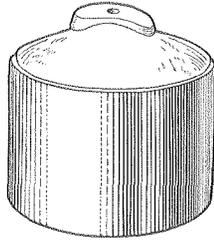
Die of Root End Adjusted in Swaging Ring
